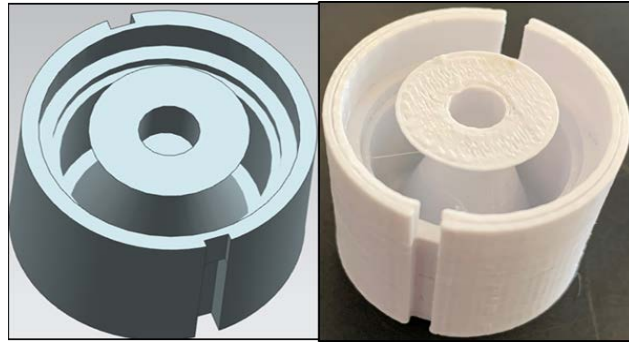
(Left) 3D Model of the Negative Mold of Rocket Nozzle. (Right) PLA Printed Negative Mold of Rocket Nozzle.
